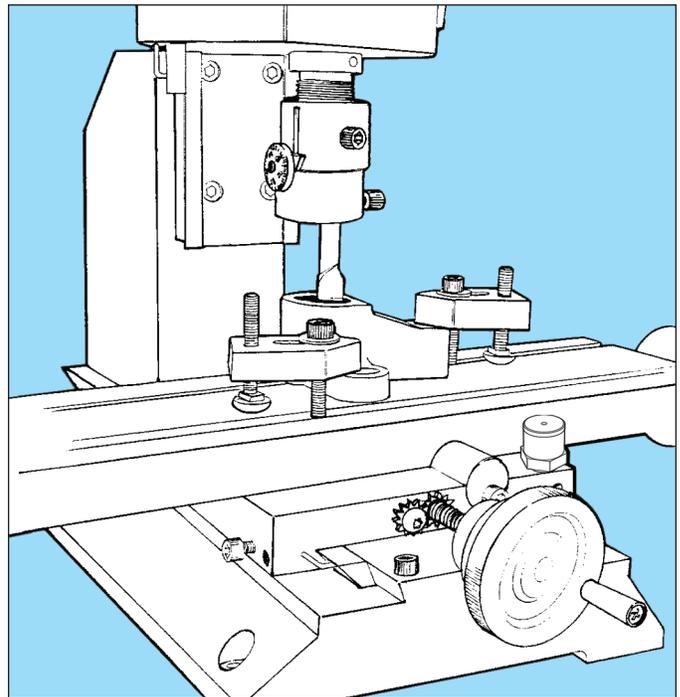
Boring the inside of a hole to exact size with a boring tool held in a boring head.
